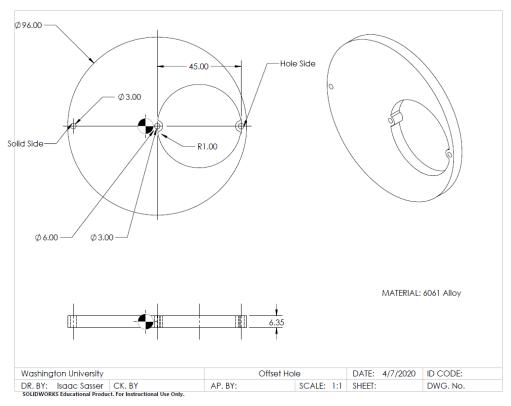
SOLIDWORKS drawing for the offset hole specimen.
